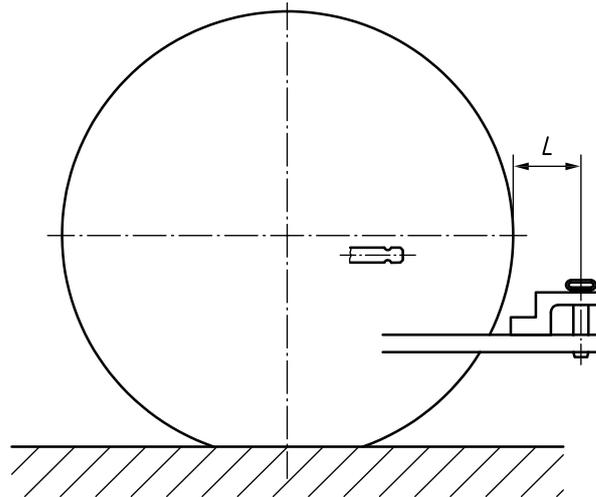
Location of dimension  $L$  — Wheeled tractors
